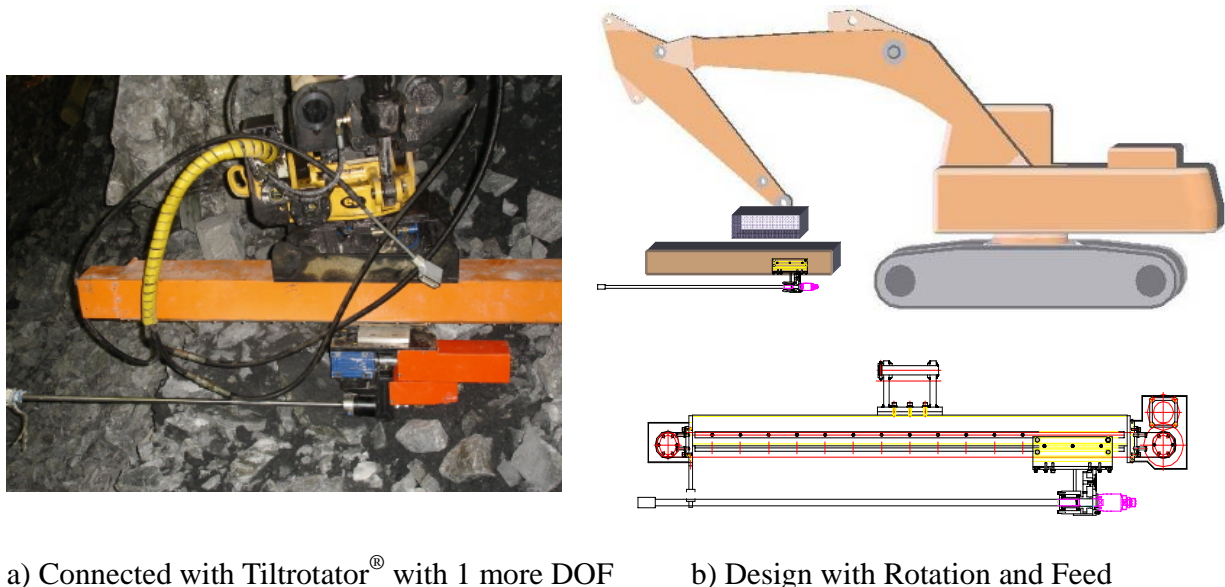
Water Jet Drilling System with Rotation and Feeding equipped on Excavator
